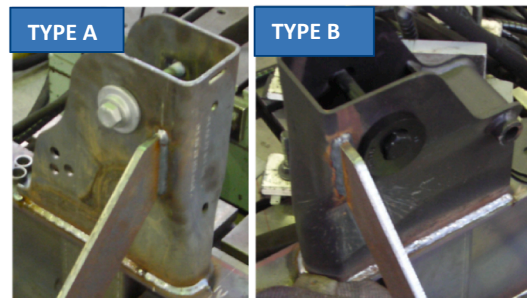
Curve-shaped (Type A) and straight-shaped (type B) axle bracing supports in testing assembly.
